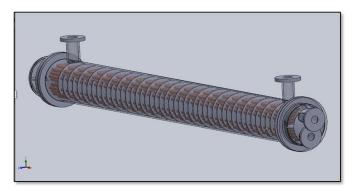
CAD Model (Industrial Heat Exchanger)
